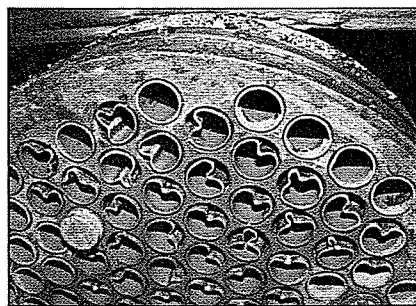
Typical cleaning damage to tube-to-tubesheet joint (pressure washing)
